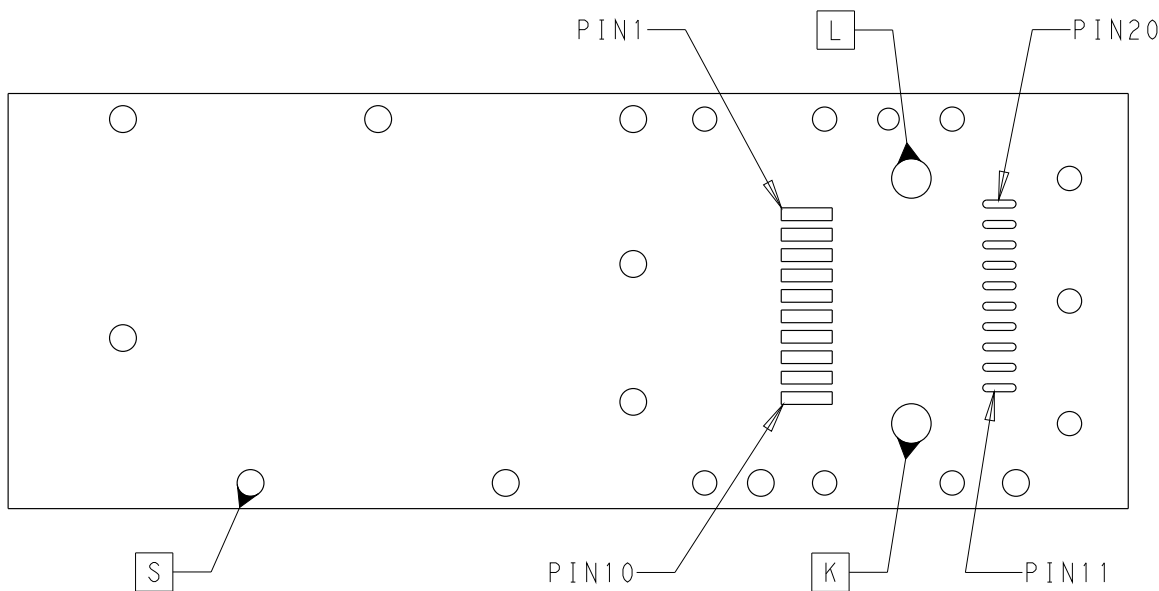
1x1 Connector Design and Host PCB Pad Numbers
